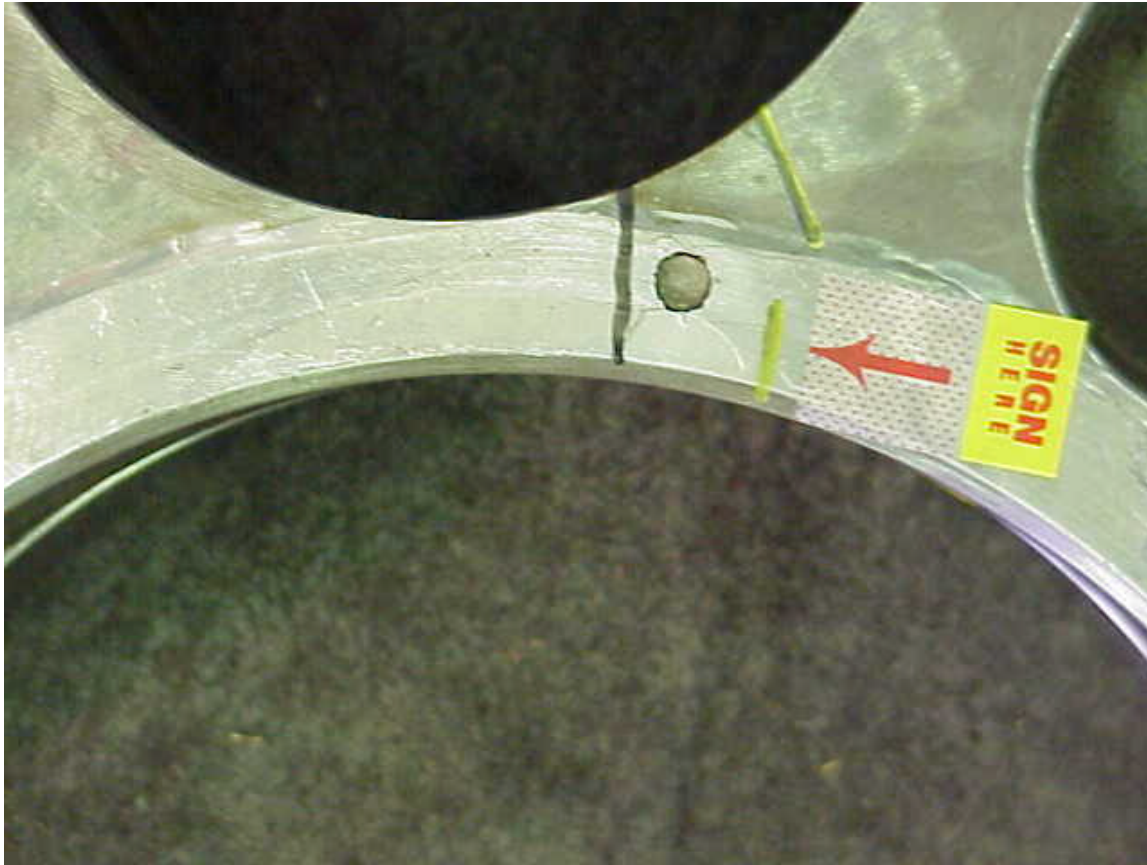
Close-up of side-view showing approximate location of crack on #9 (black line) and location of EDM notch (yellow line)
